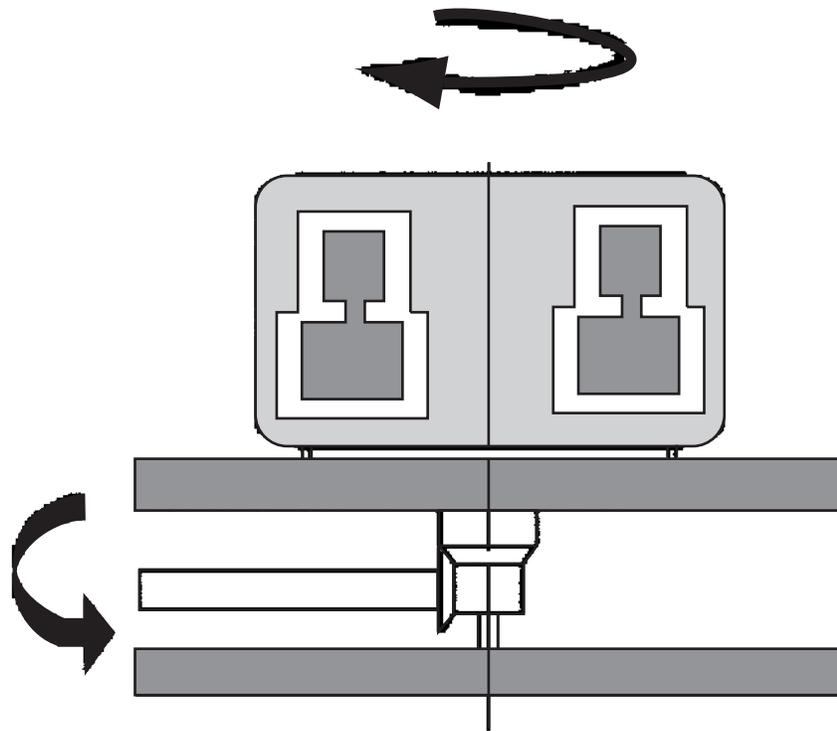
Rotational Molding. The machine rotates the mold in two axes, allowing the melted plastic to coat the walls of the mold evenly.
